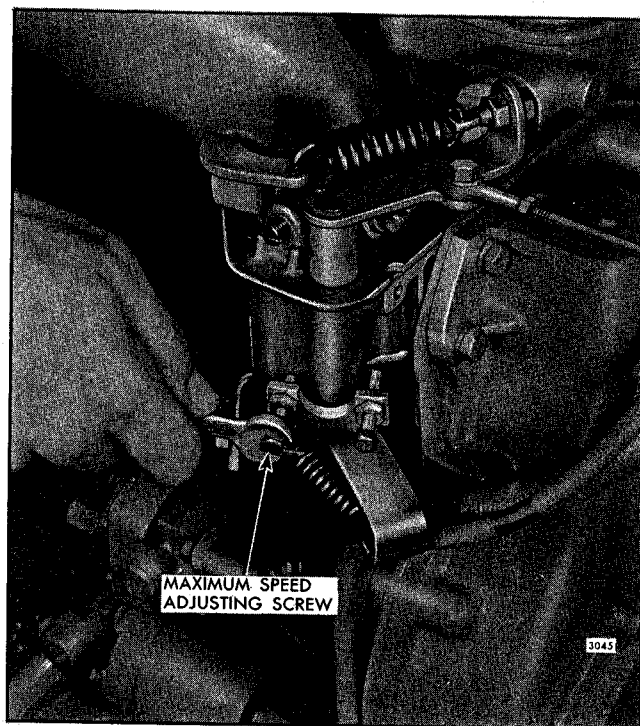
Adjusting Maximum No-Load Engine Speed
